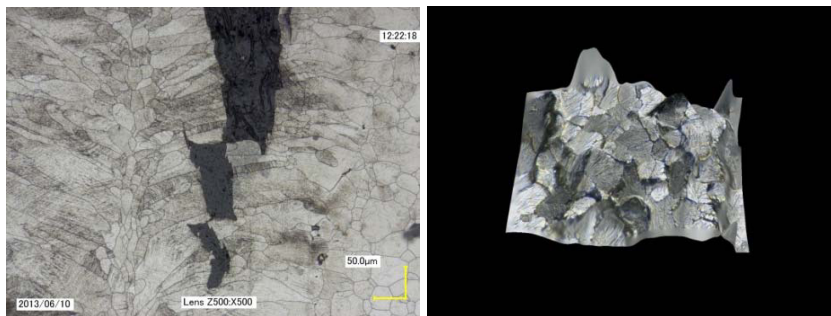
Brittle cleavage fracture of unshielded EN 1.4521 weld at 8° bending angle (sample E23Air)
